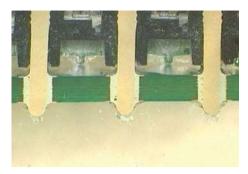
Assessment of the fill level for 2.6 mm pin in 1.6 mm thick PCB
